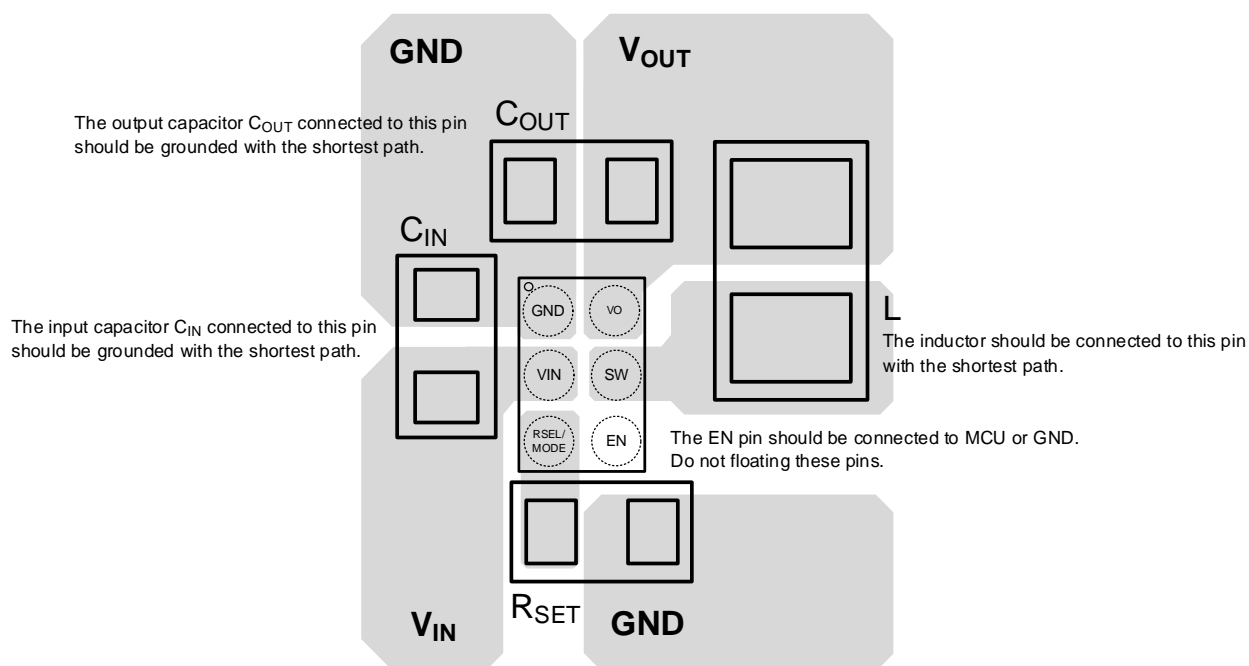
PCB Layout Guide for TWL-CSP-6B 0.69x1.04 (BSC) Package
